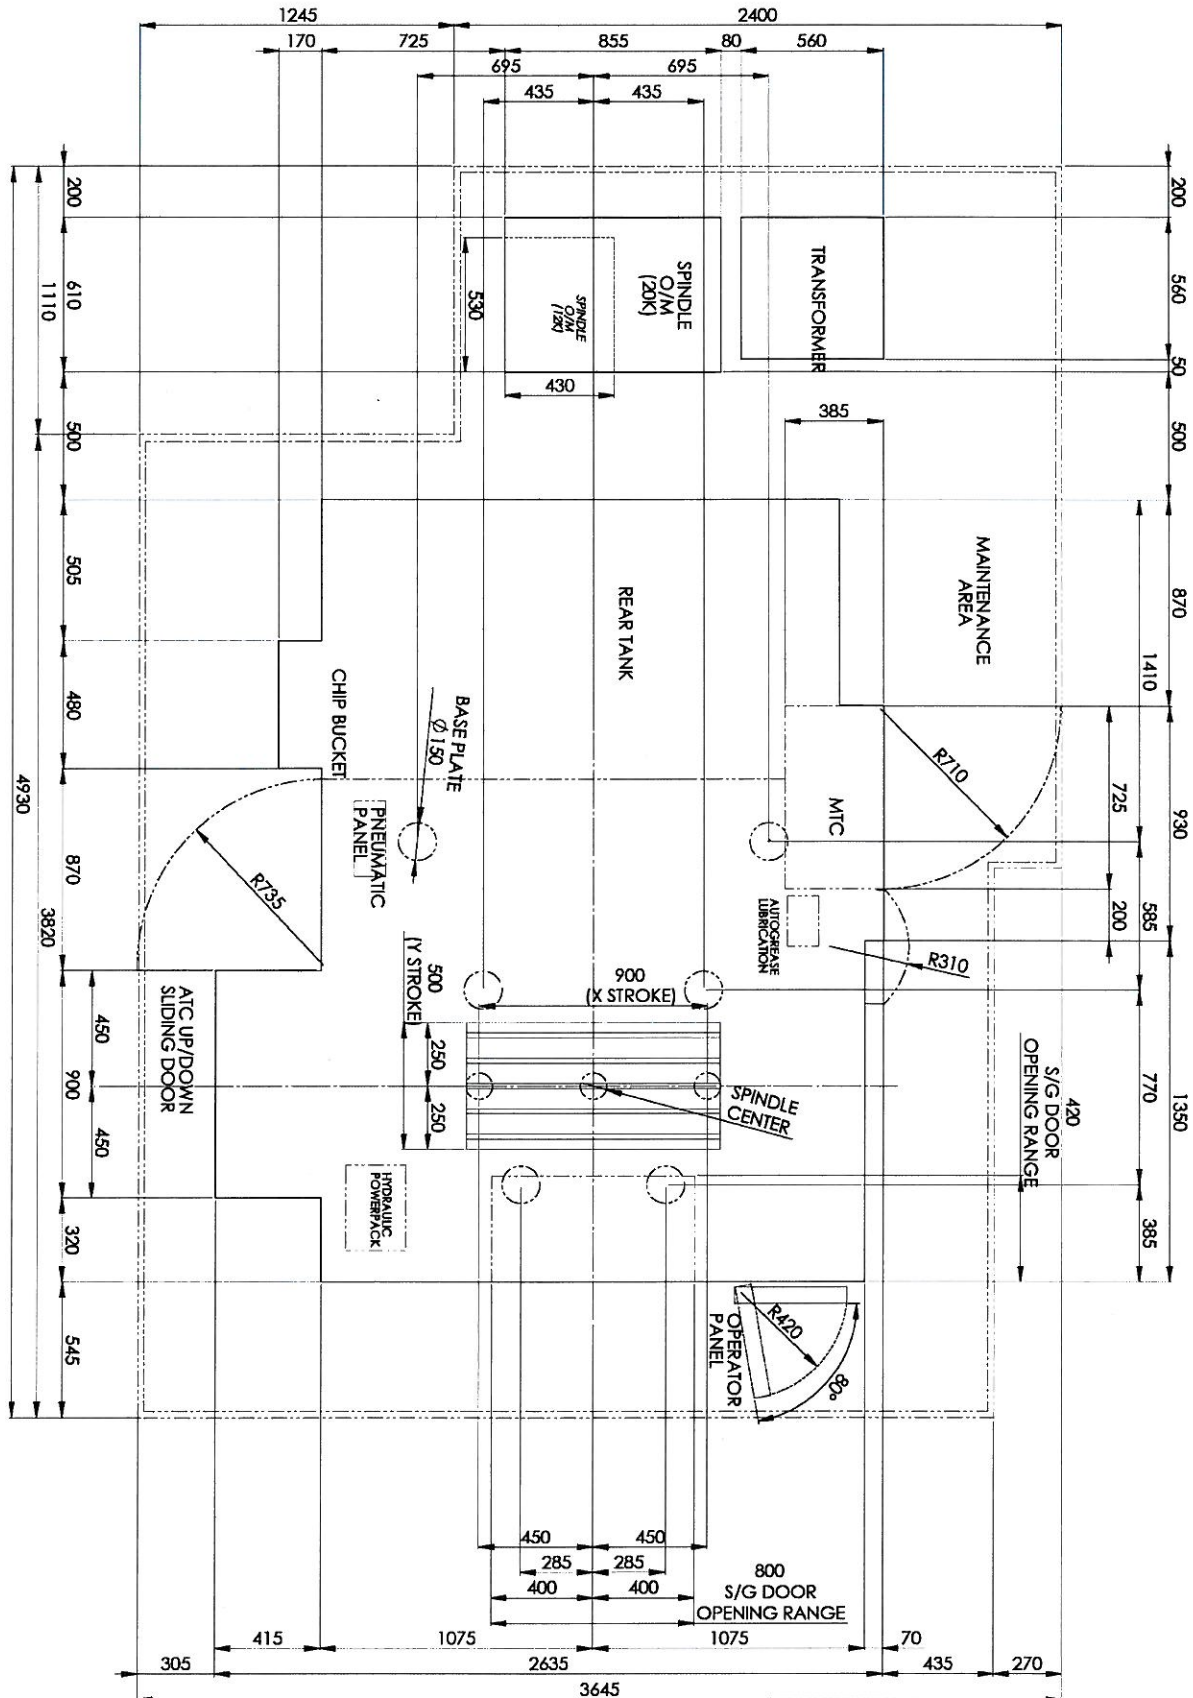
F5 Floor Layout (Rear Tank)
